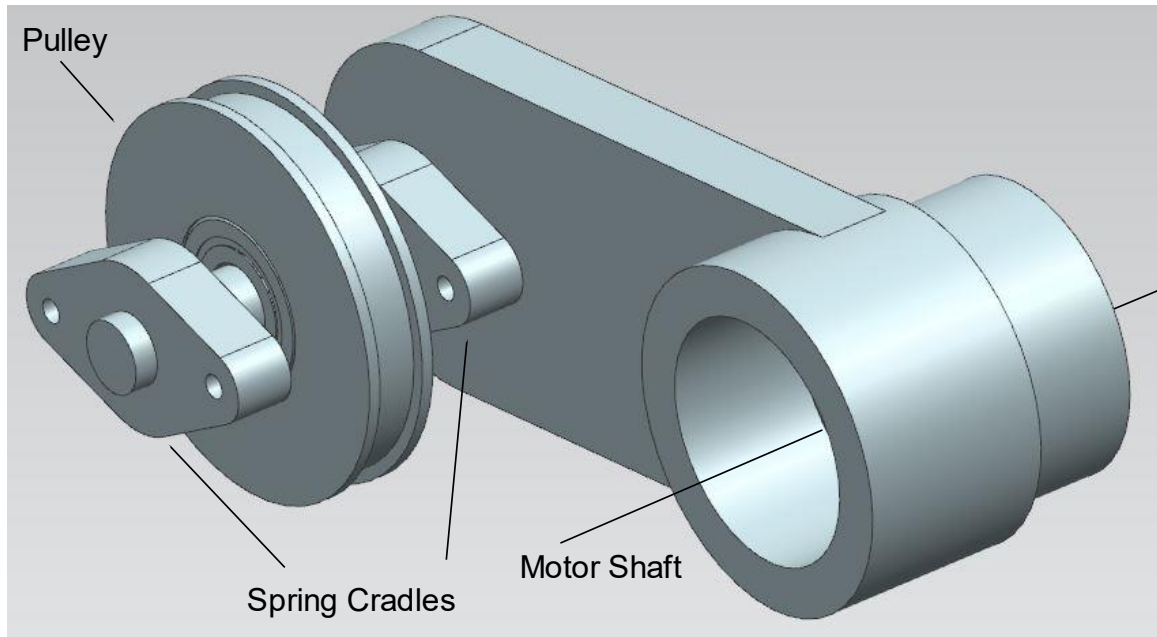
Lever Mechanism Lever Piece & Shaft Assembly
